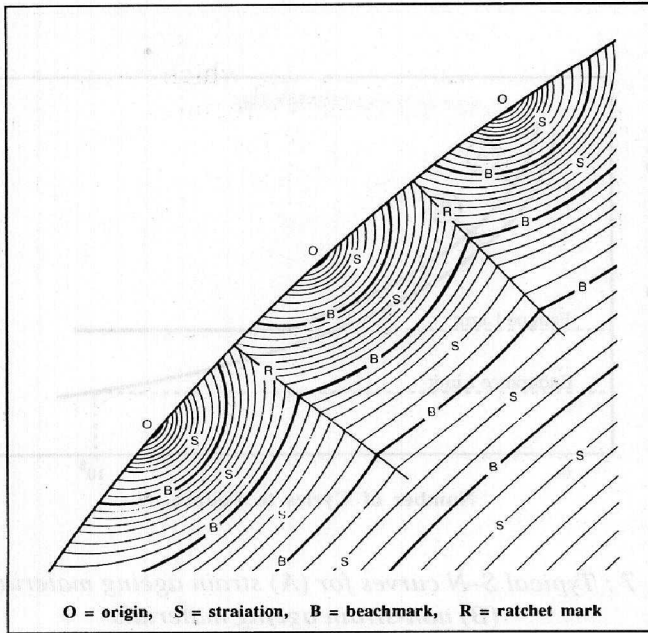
Schematic sketch of fatigue fracture surface showing beachmarks and striations
